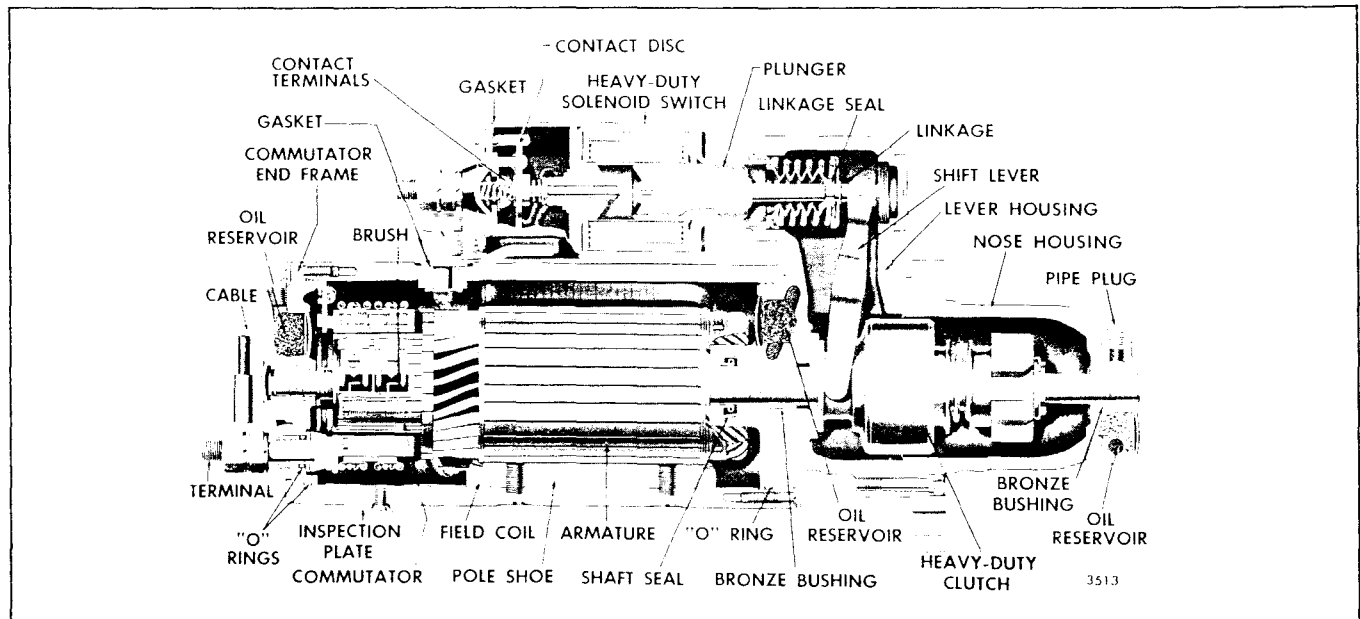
Cross-sectional View of Motor with Sprag Heavy Duty Clutch
